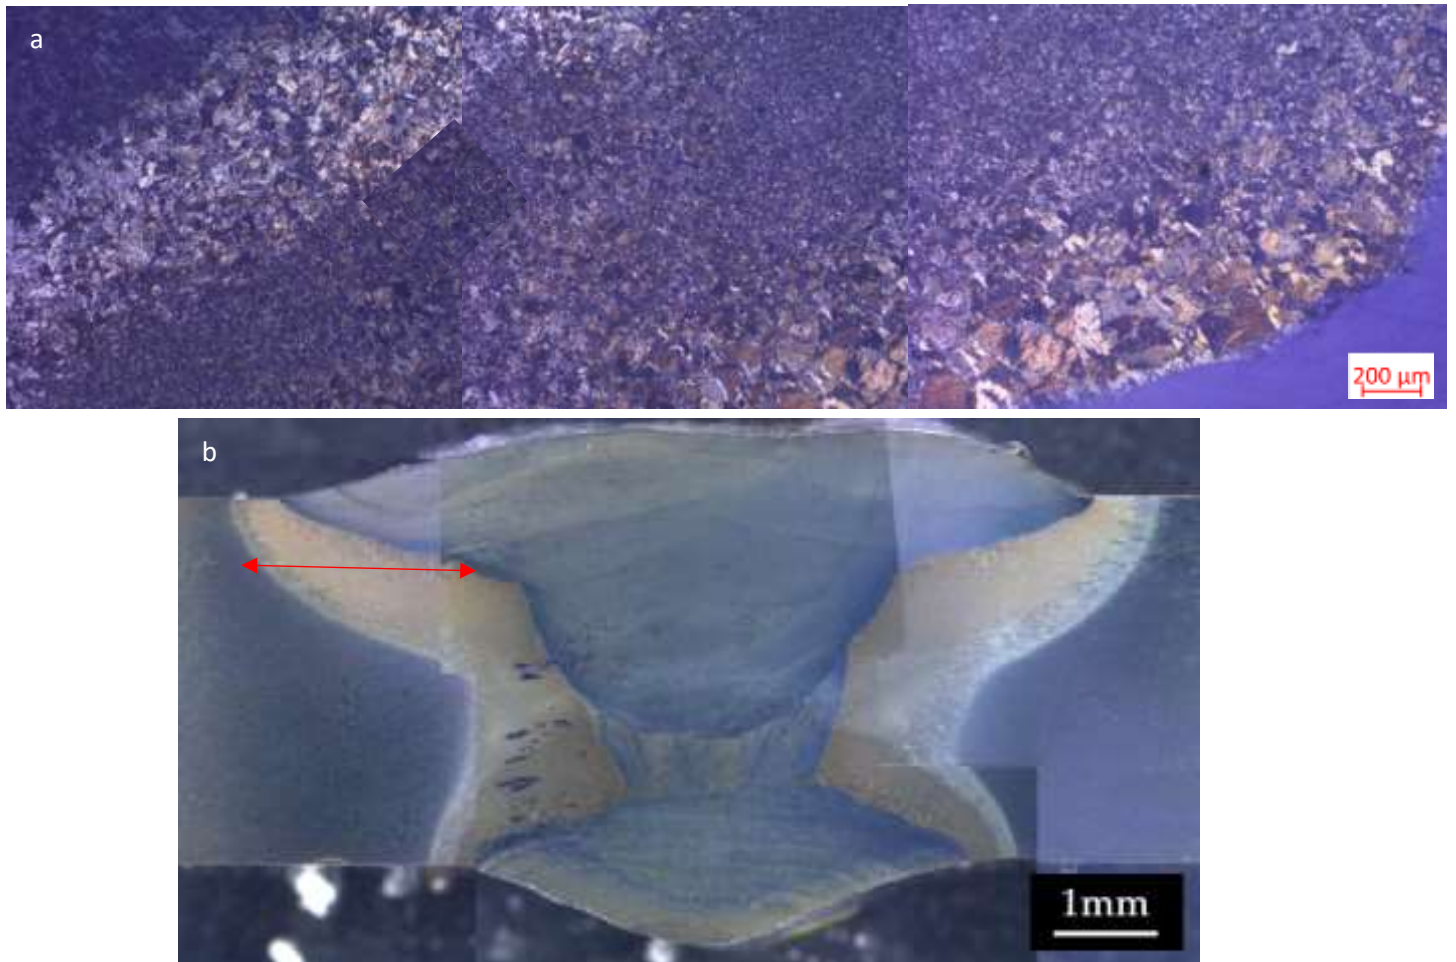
Optical microscope picture of welded sample heat affected zone (a) and weld bead section (b)
